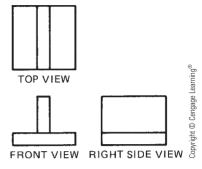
Three-view orthographic drawing of a fabricated T-support.
